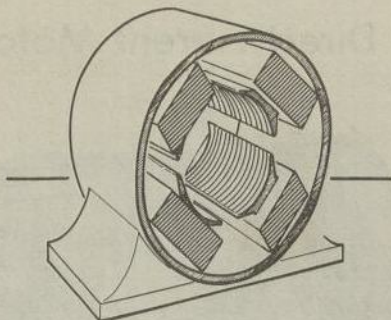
A complete field assembly and frame of a d-c motor.
